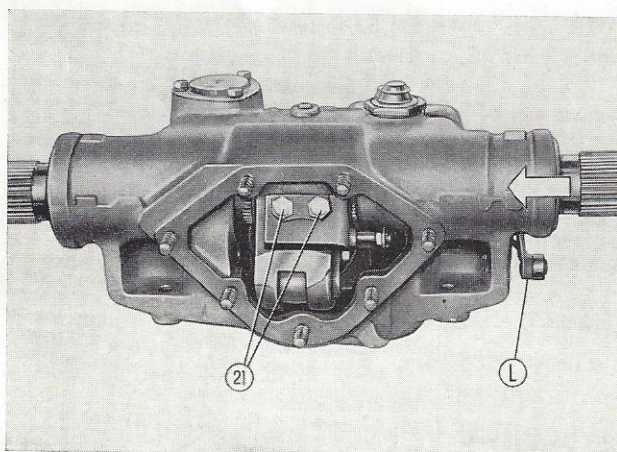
/1. - Arrangement of valves on lift assembly.
